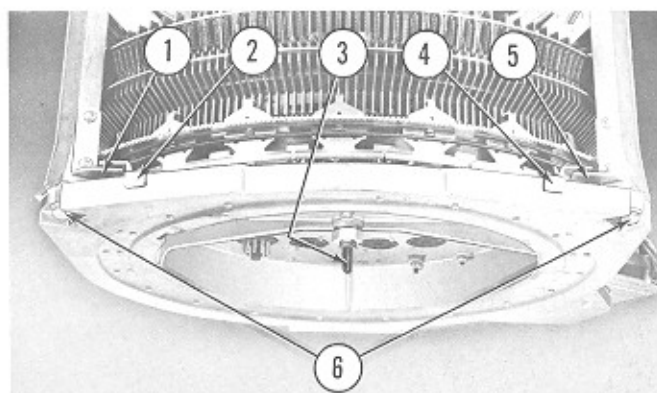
ELECTRICAL SELECTOR CENTERING - 2800
